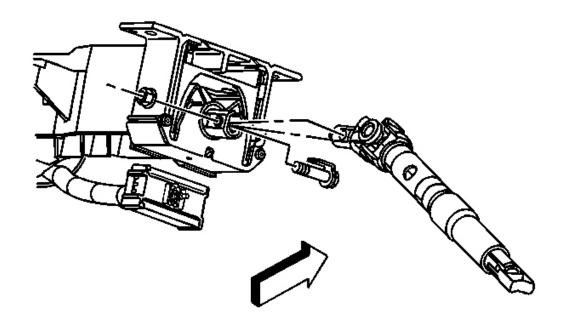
View Of Steering Column & Upper Intermediate Shaft Courtesy of GENERAL MOTORS CORP.
